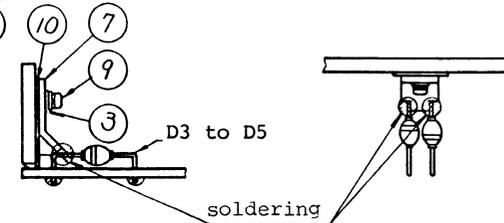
HLP A Circuit Board Assembly (LY-43360)
